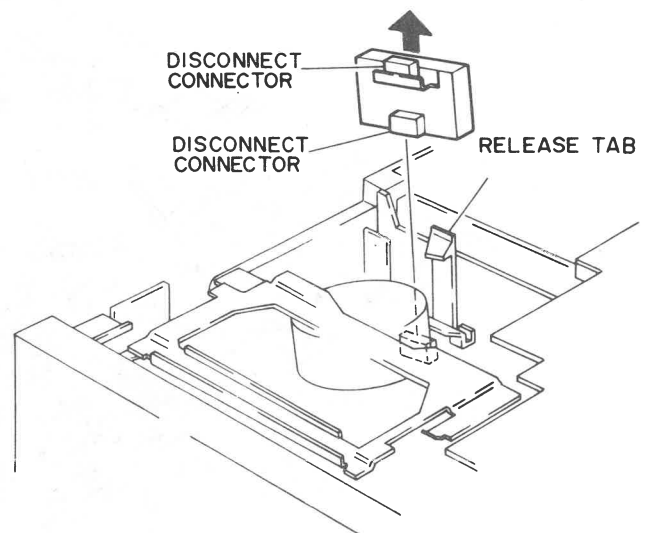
Pre-amp/Head Switch Circuit Board Removal
